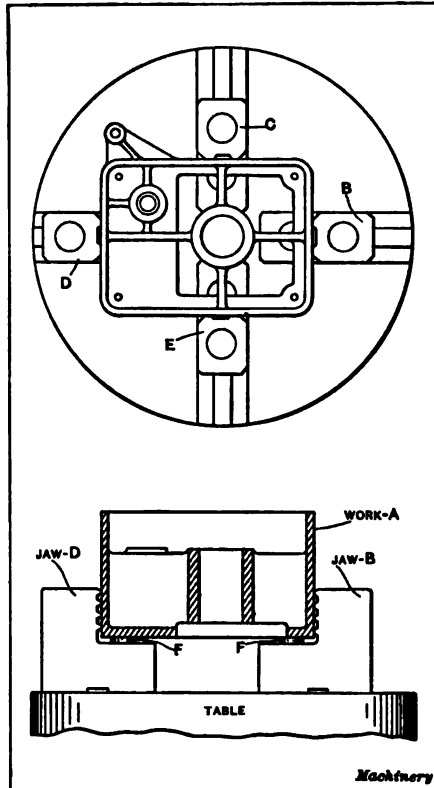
Use of Four-jaw Chuck for Holding Rectangular Work on a Vertical Lathe or Boring Mill
